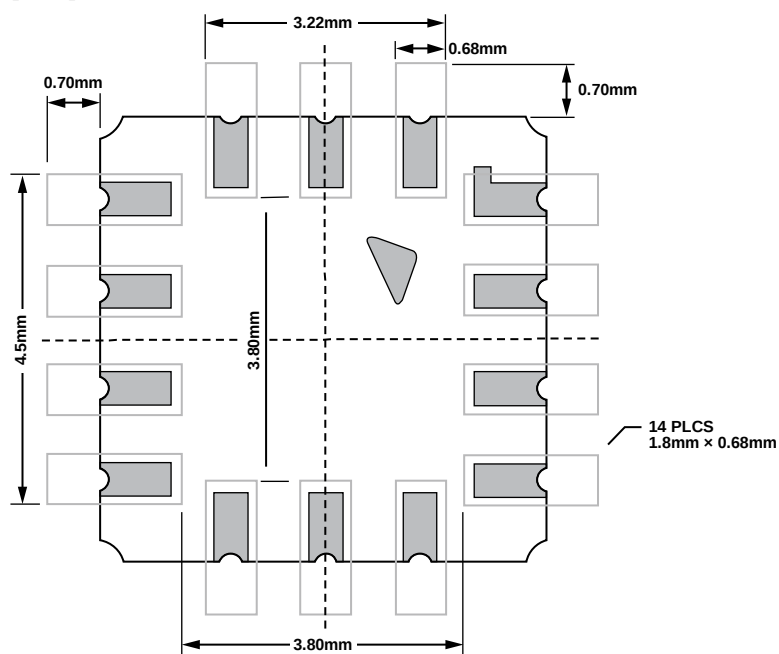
PCB Footprint Pattern and Dimensions in Millimeters
